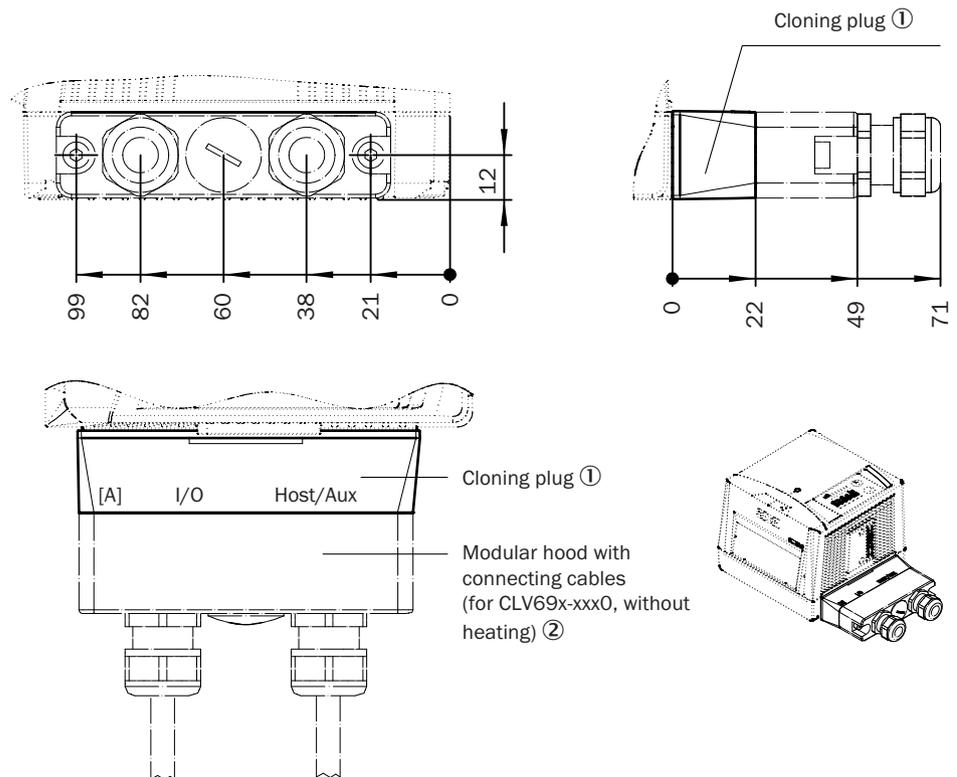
Dimensions of cloning plug A (D-Sub), with the hood of a connecting cable. All dimensions in mm.
